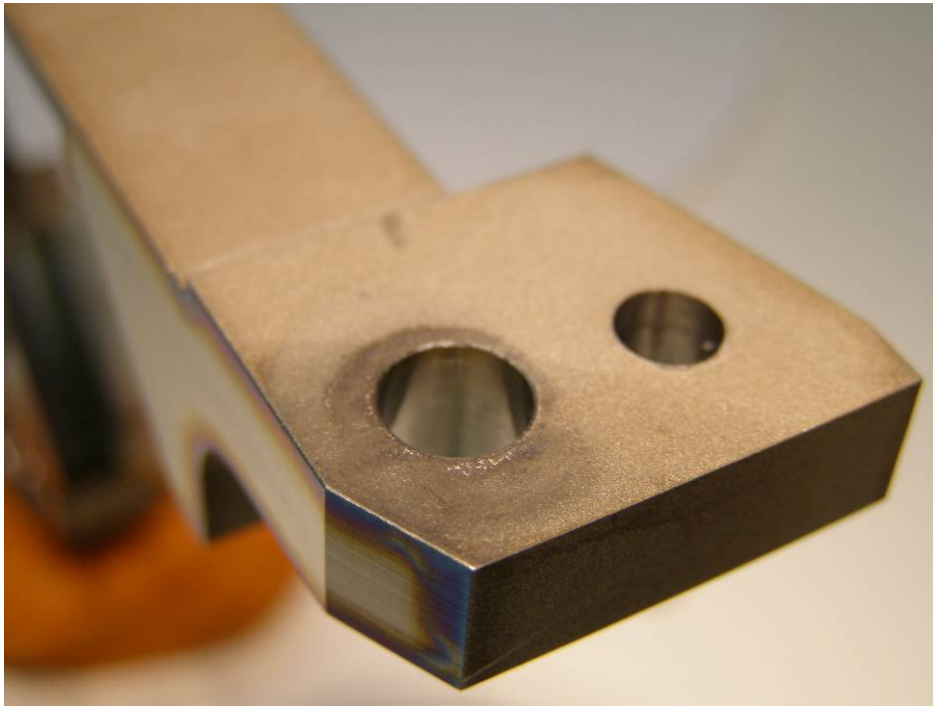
Fretting around the bolt hole (left) but not the dowel hole (right).
